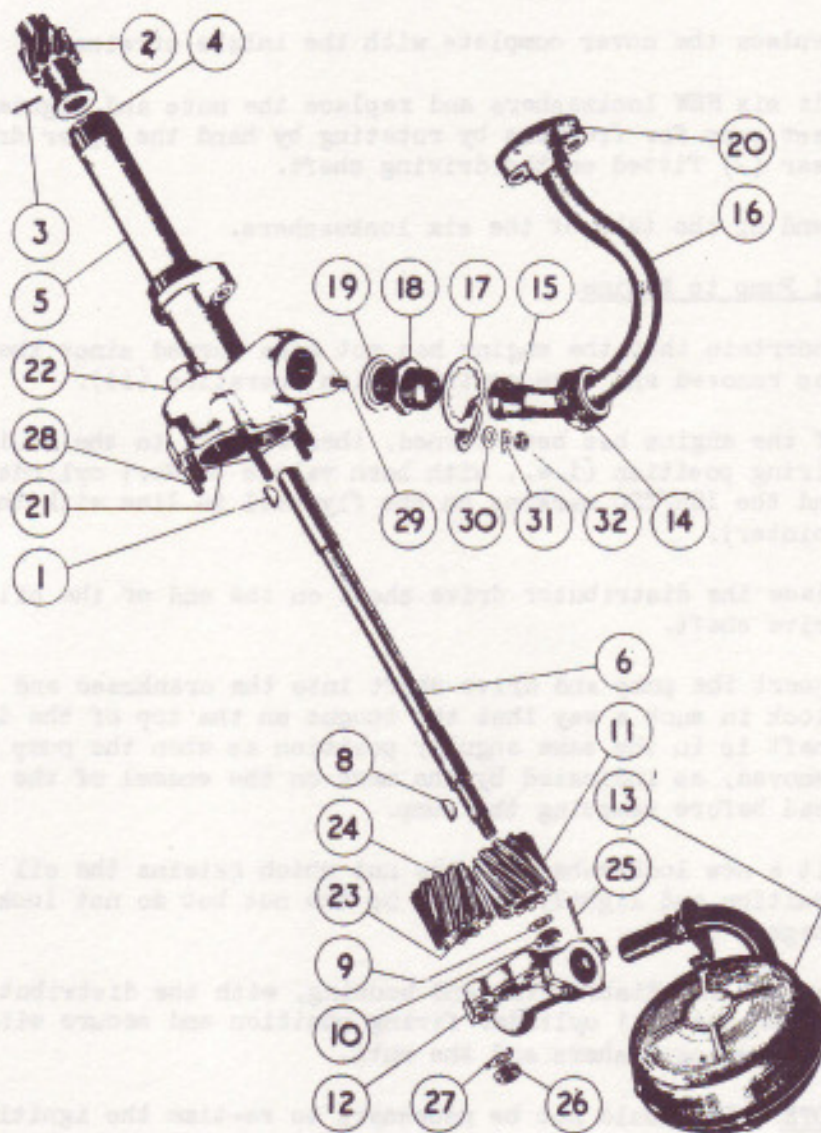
OIL PUMP AND DRIVE DISMANTLED.
